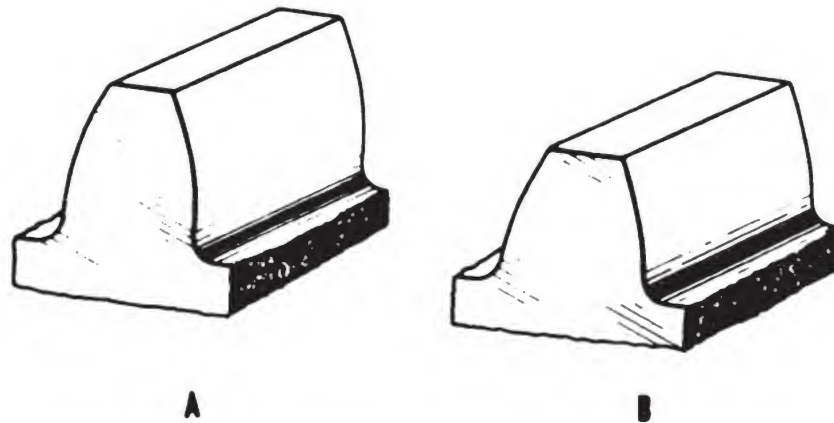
A. A standard $14\frac{1}{2}^\circ$ spur gear tooth. B. A 20° spur gear stub tooth.
